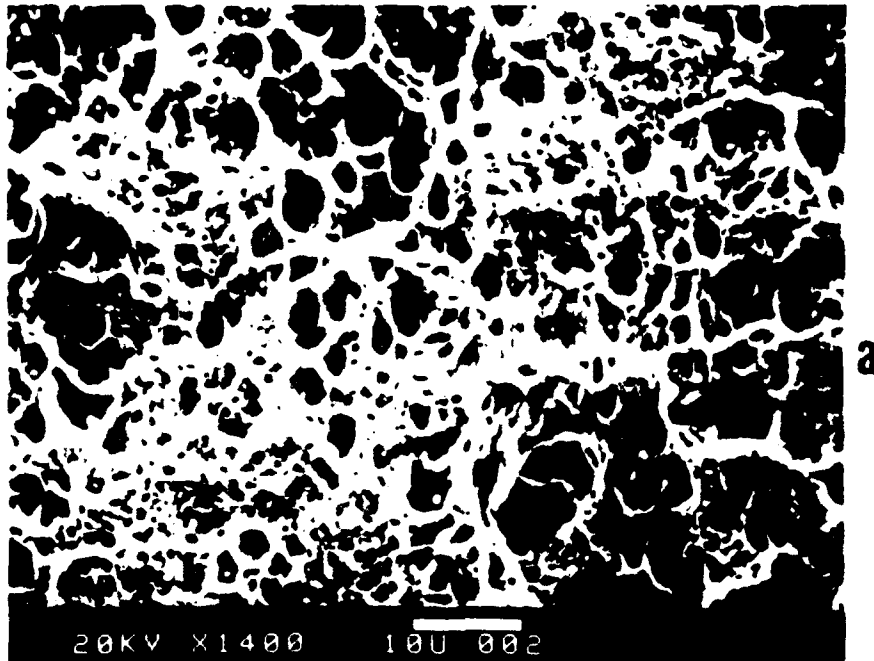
Fracture surface of the upper flank of asymmetric specimens in
